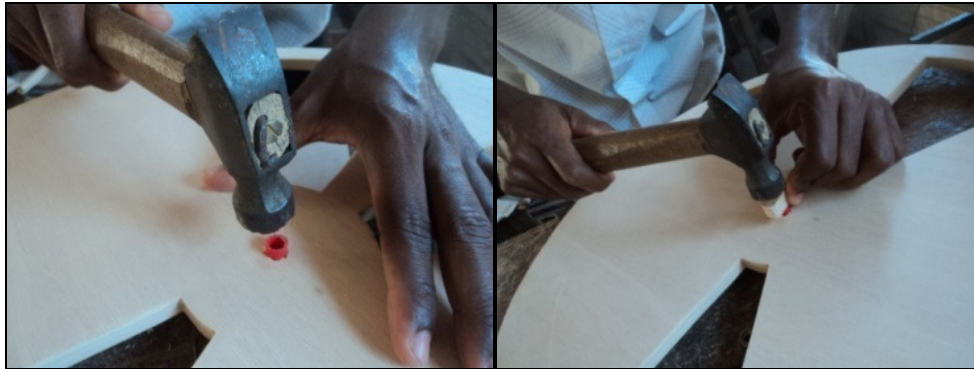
Knocking cylindrical plastic tube into colour wheel and components
